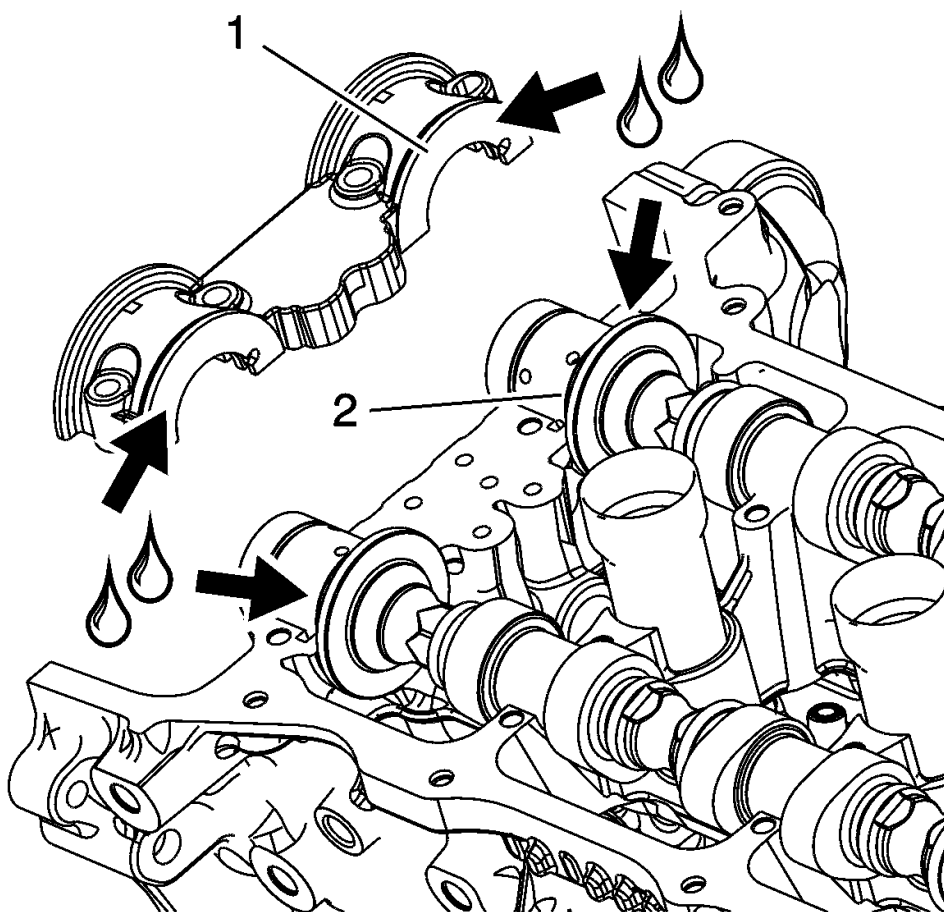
Camshaft Bearing Cap And Camshaft Thrust Surface
